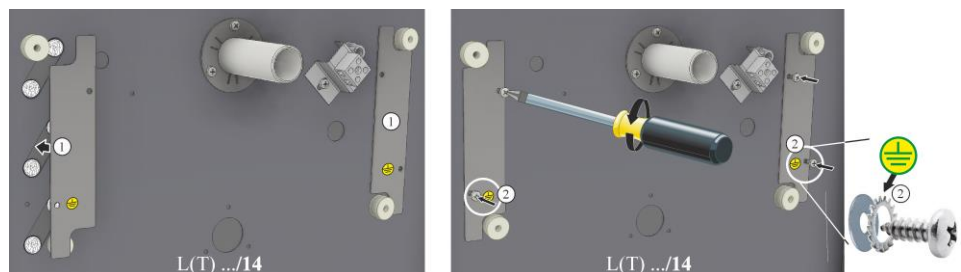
Installing the cover plates (only model L(T) .../14) (similar to picture)
